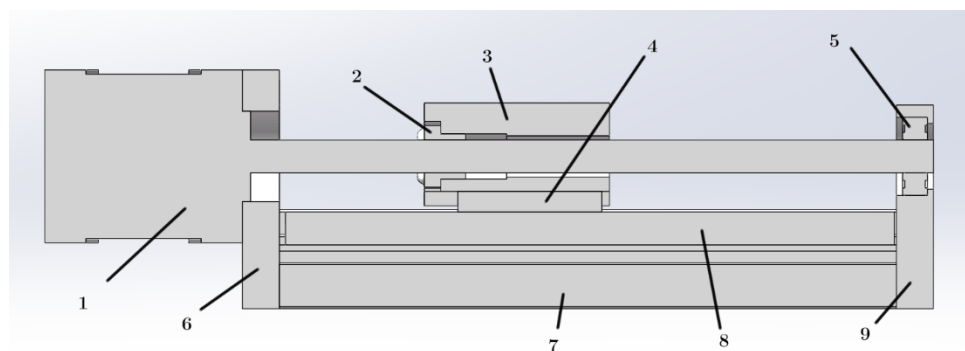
Cross-section view of the platform core, 1. Stepper motor with screw, 2. Ball bearing, 3. Platform, 4. Guide rail slider, 5. Bearing, 6 and 9. Fiberglass plates, 7. Aluminum profile, 8. Guide rail
